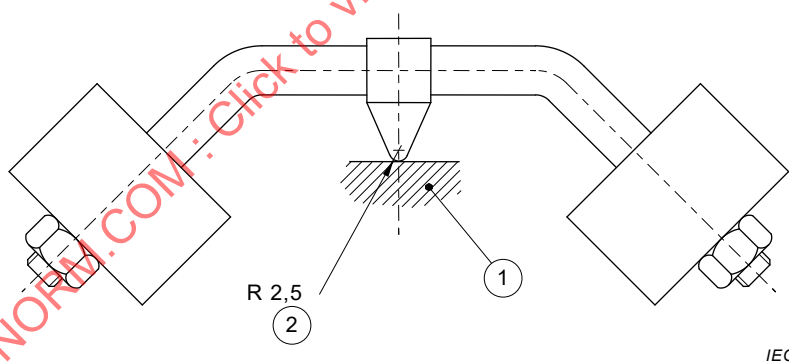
Example of mounting of panel mounting type RDC-DD for the mechanical impact test (9.12.2.1)
